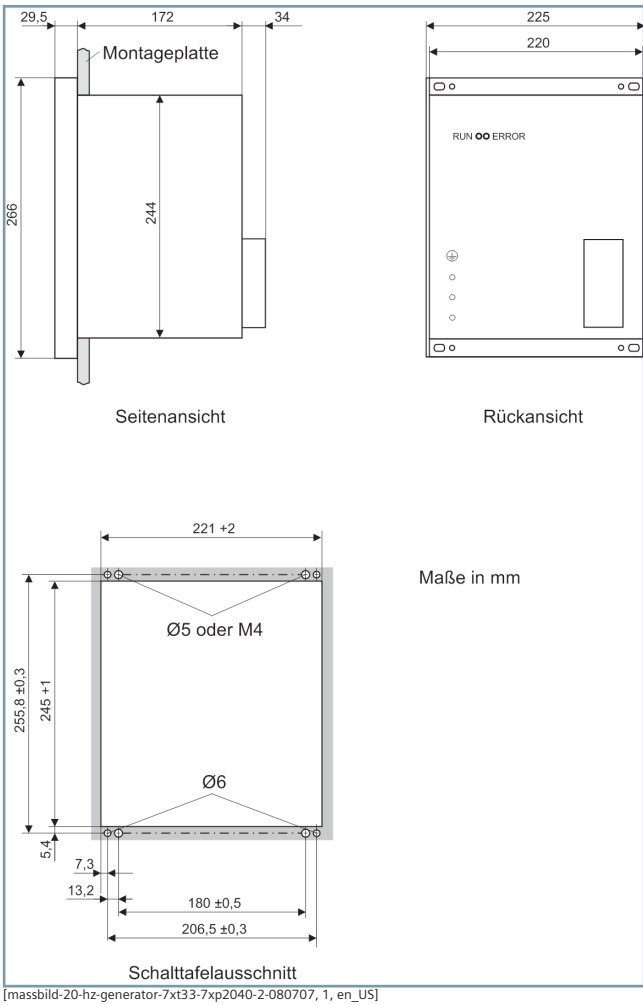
/6 Dimensional Drawing, 20-Hz Generator 7XT3300-0BA00/DD for Panel Surface Mounting
